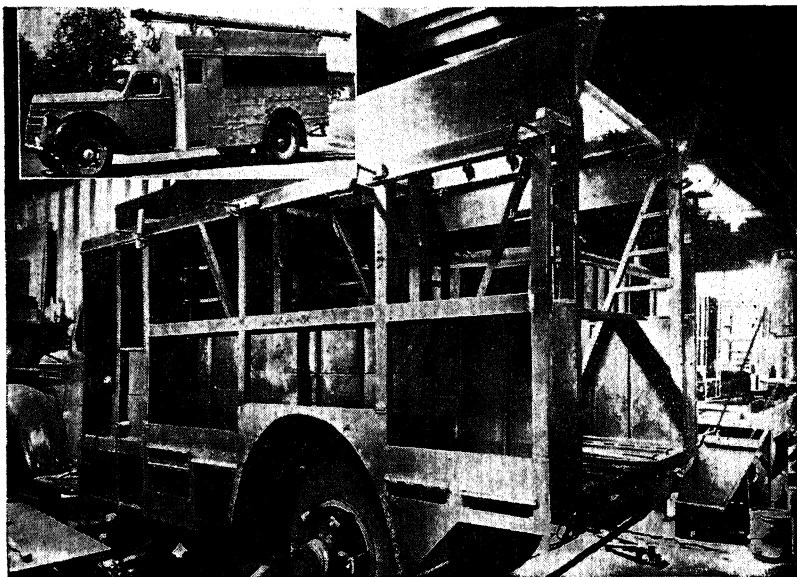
Service truck used by a Public Utility. Welded construction with high tensile steel saved 10% in weight over riveted construction, and reduced cost substantially.
